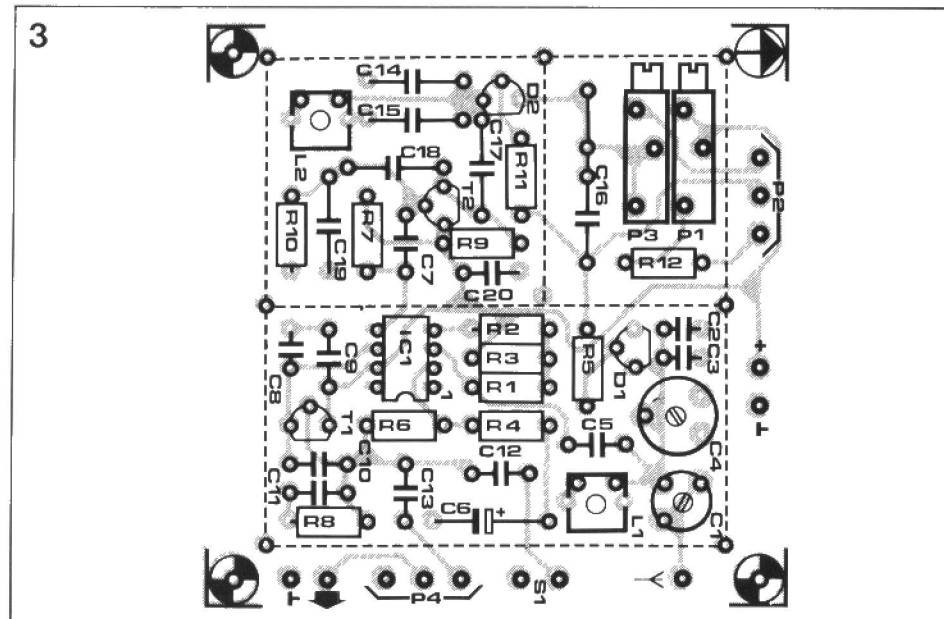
Track layout and component mounting plan of the double-sided printed circuit board for the direct-conversion receiver.
